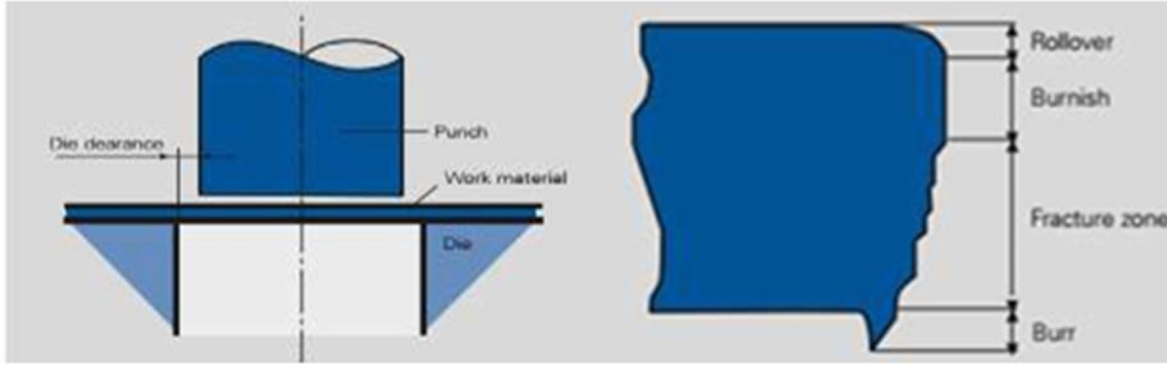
Die Clearance Definition and Appearance of a Cut Edge [9]
